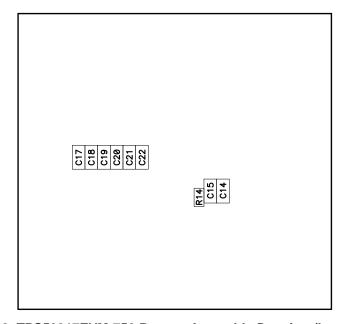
TPS53317EVM-750 Bottom Assembly Drawing (bottom view)
